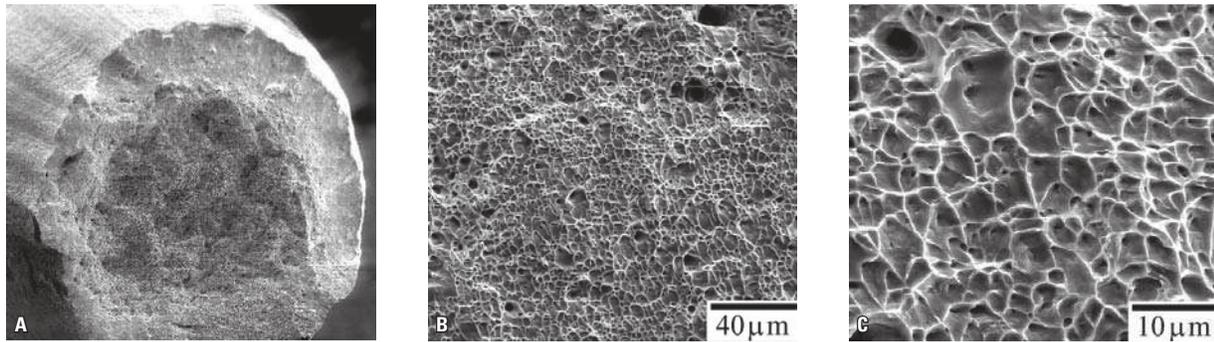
Fractograph of \varnothing 0.9 mm wire that underwent tensile testing in different magnifications: A) surface of wire fracture; B, C) enlargement of region shown in A).
